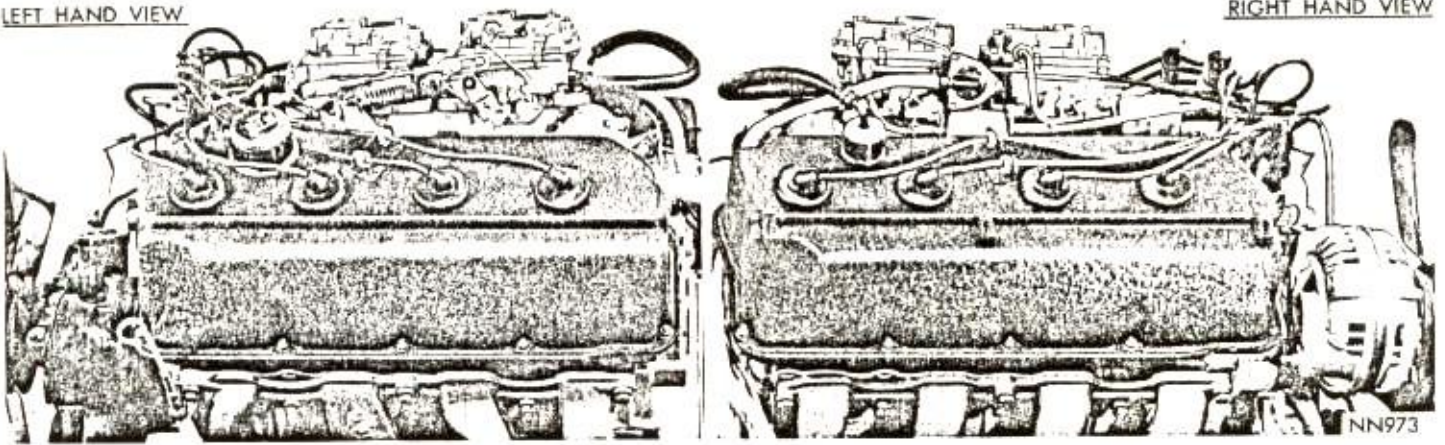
Twin 4 Barrel Carburetor Assemblies
